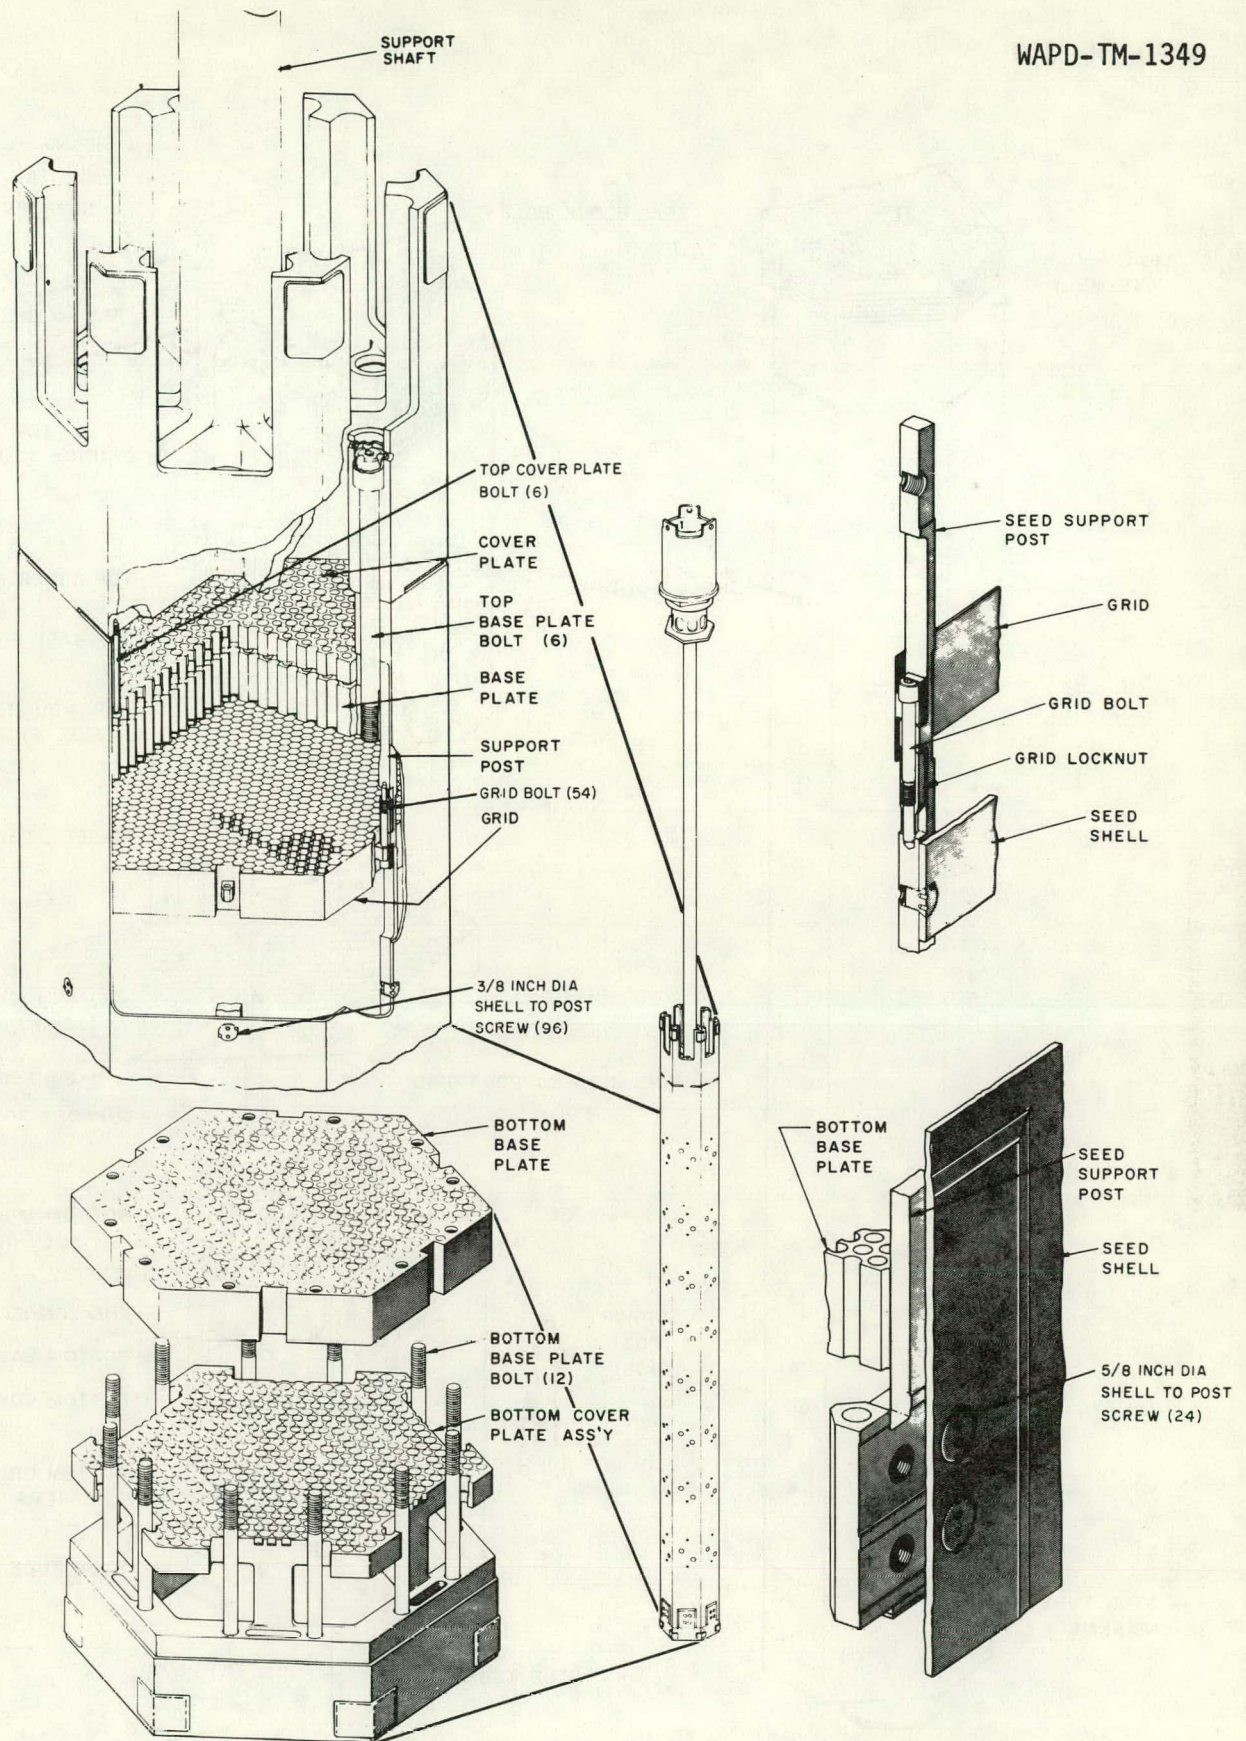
Bolted Joints in the LWRB Movable Fuel Assembly
